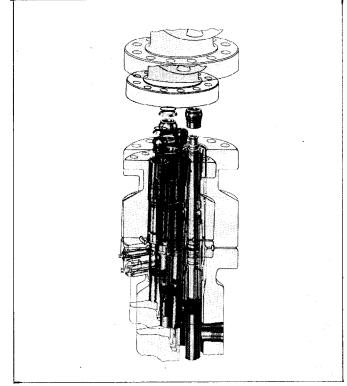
Sectional View Dual Tubing Hanger Assembly for Lifting Both Tubing Strings with Christmas Tree in Place
